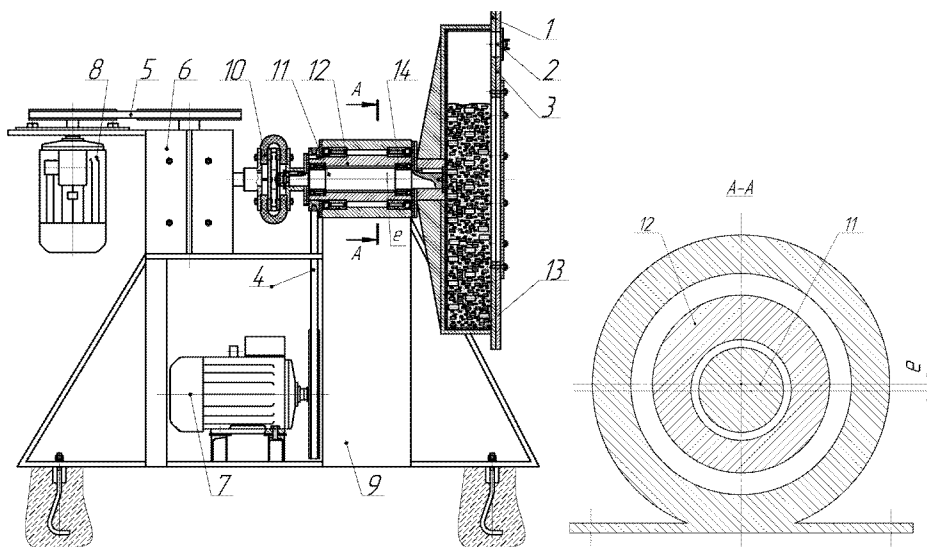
1. Scheme of rotational vibration mill: 1 – drum; 2 – loading and unloading opening; 3 – drum cover; 4, 5 – belt transmission; 6 – reducer; 7, 8 – motor; 9 – frame; 10 – flexible coupling; 11 – drum shaft, 12 – tubular shaft; 13 – grinding bodies and material; 14 – bearings, e – eccentricity
